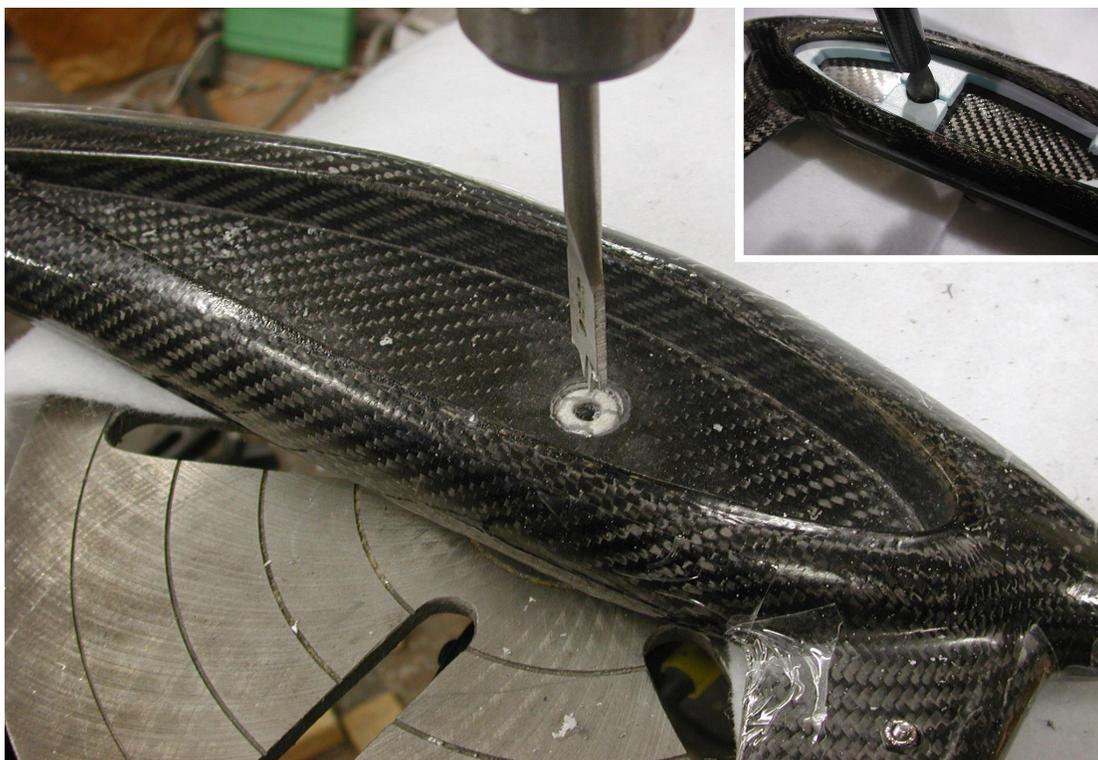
Spar Hole Marked and Drilled – detail view top right.
